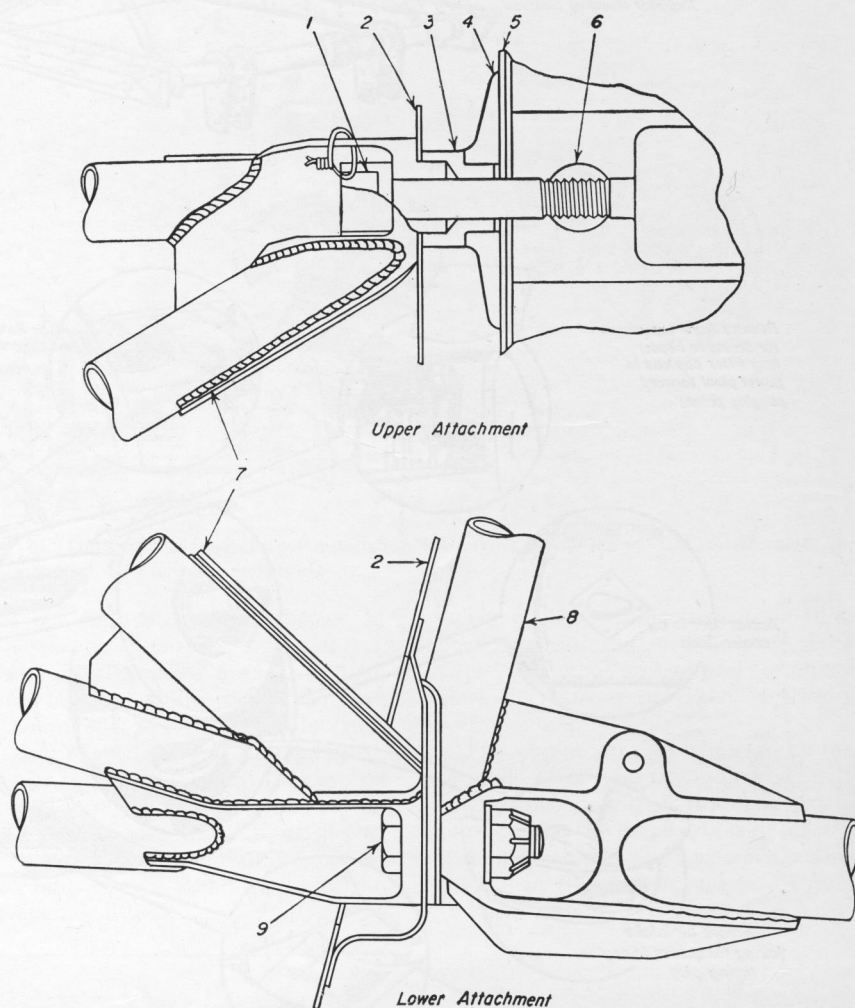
The engine mounts are attached at the top to the front shear web, and at the bottom of the landing gear support: (1) bolts (two) inboard and outboard; (2) fire wall; (3) bushing; (4) pad; (5) front shear web; (6) trunnion; (7) engine mount, of welded tubing; (8) landing gear support; (9) bolt securing the engine mount to the landing gear support.
